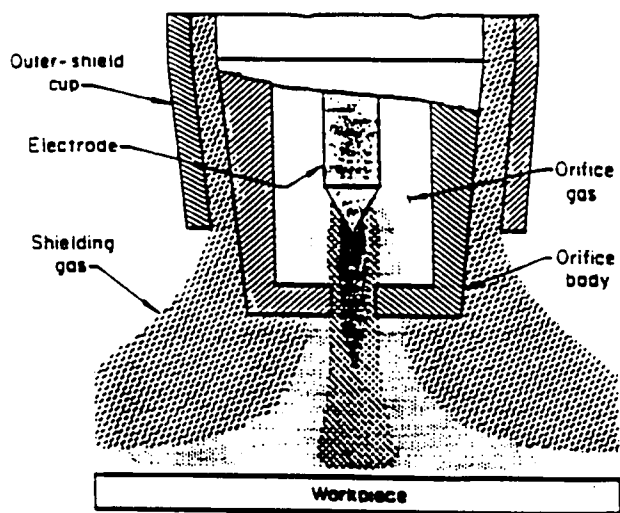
A schematic diagram of the plasma arc welding unit.
